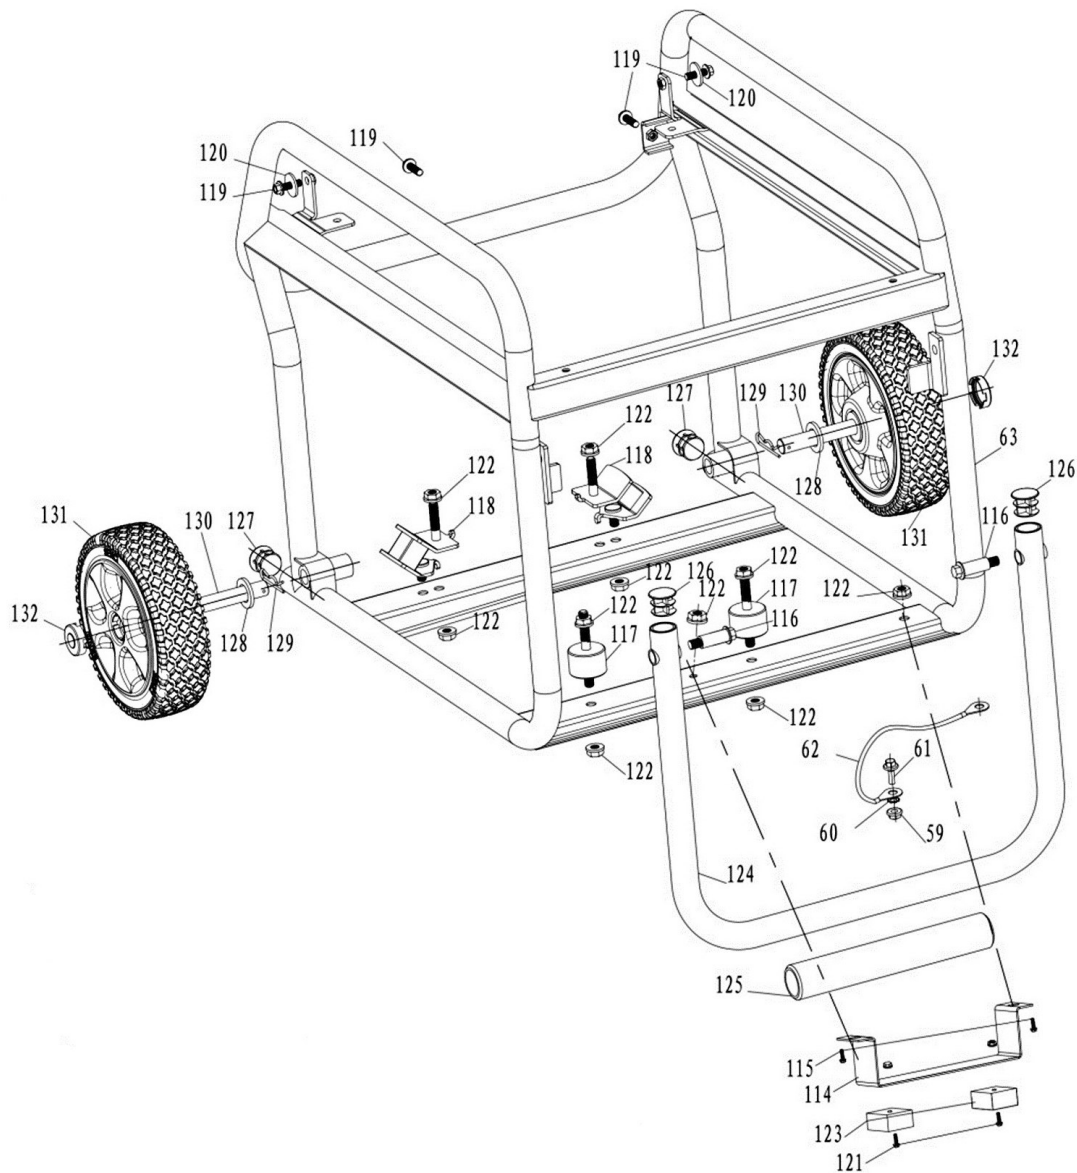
Spare parts drawing PG-E 30 SRA - complete assembly
